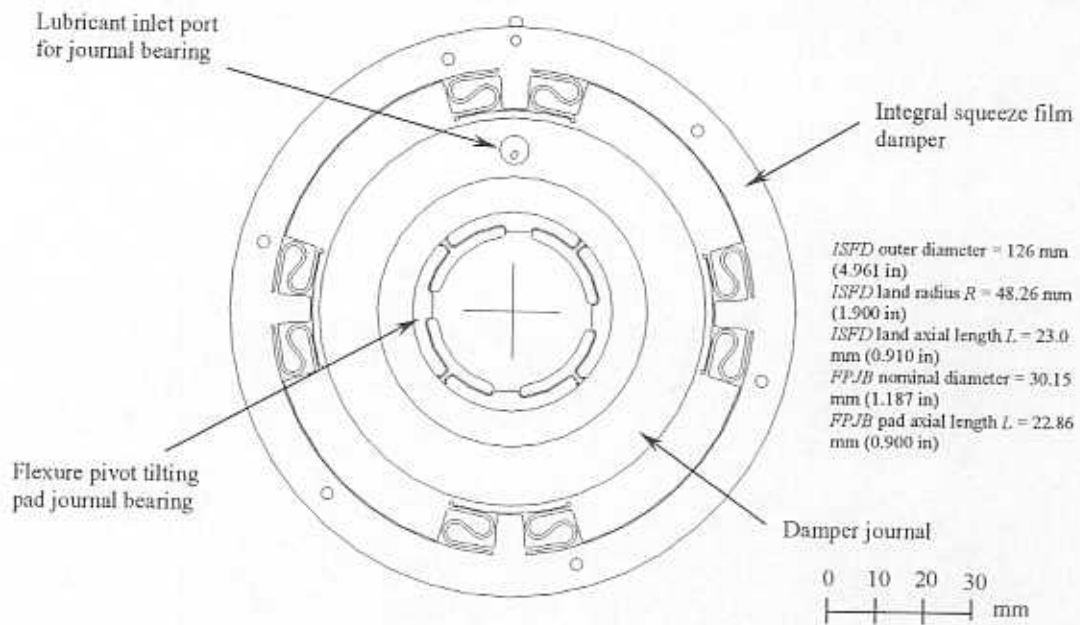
Integral squeeze film damper and flexure pivot tilting pad journal bearing assembly.
